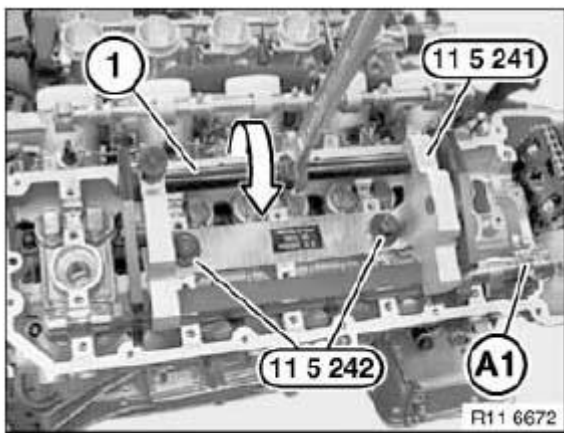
Relieving Tension On Eccentric Shaft At Hexagon Head (2 Of 2)
